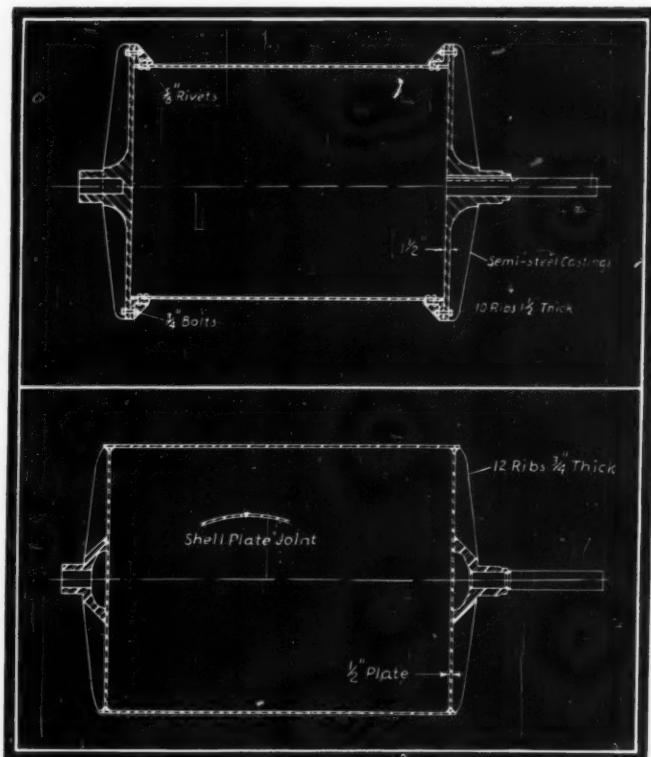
(Top)—Original design necessitated large patterns. (Below)—Redesigned constructed using welding method
